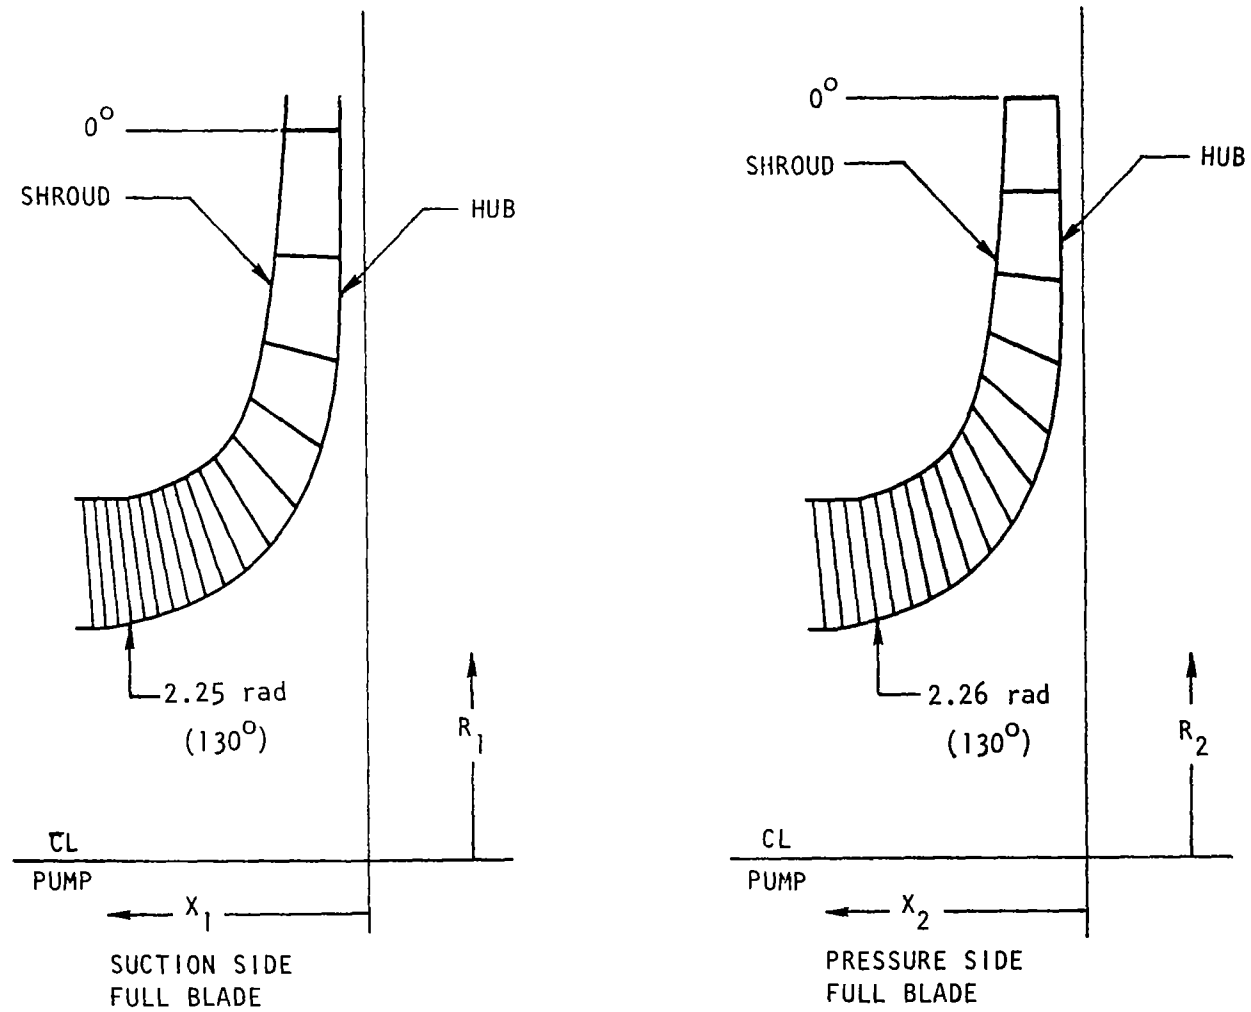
Impeller Cross-Section Layout With Full Blade Wrap Angles
